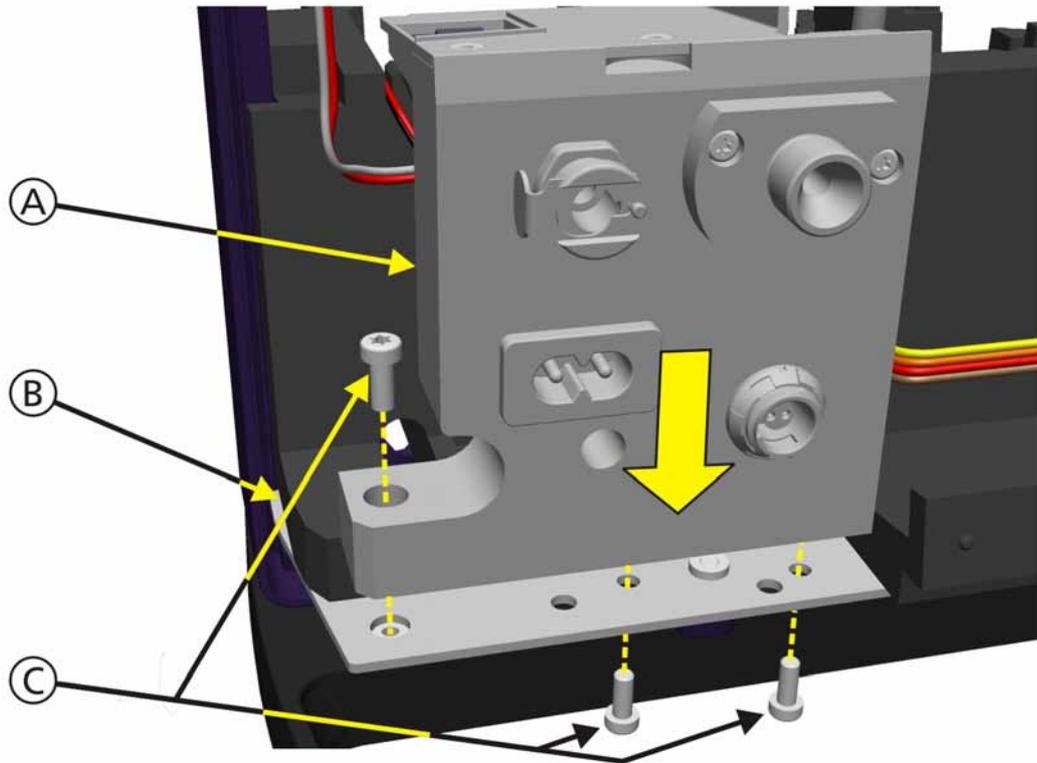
Oxygen Mixer Block Assembly Mounting
